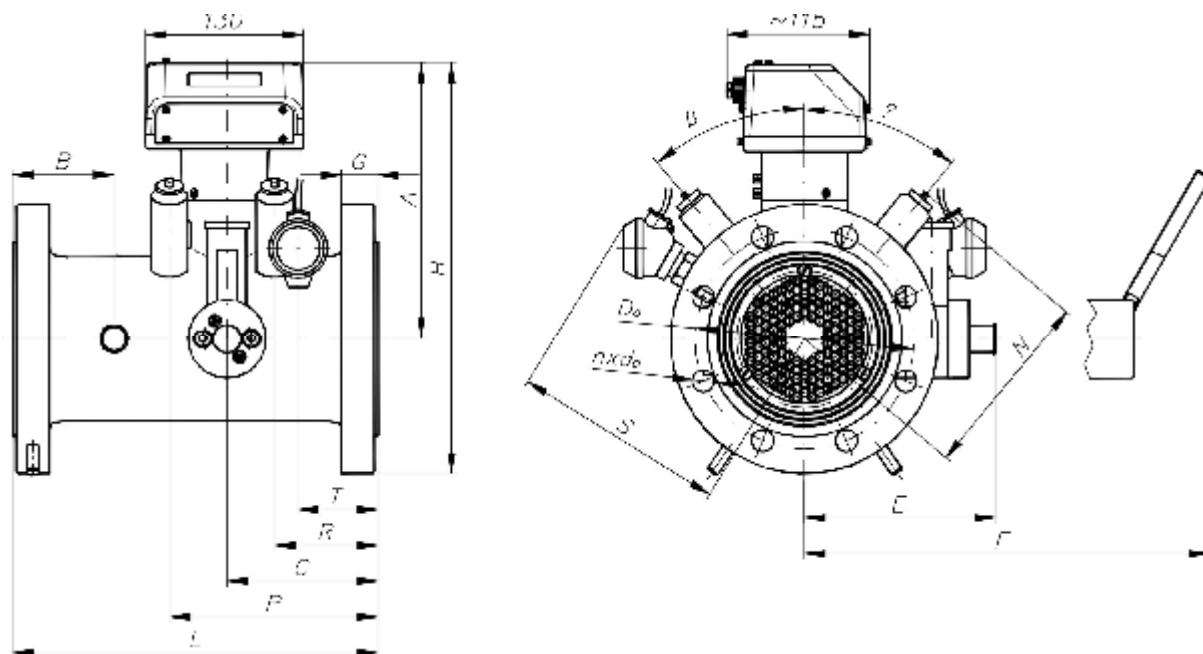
Basic dimensions of the CGT-02 Turbine Gas Meters.
